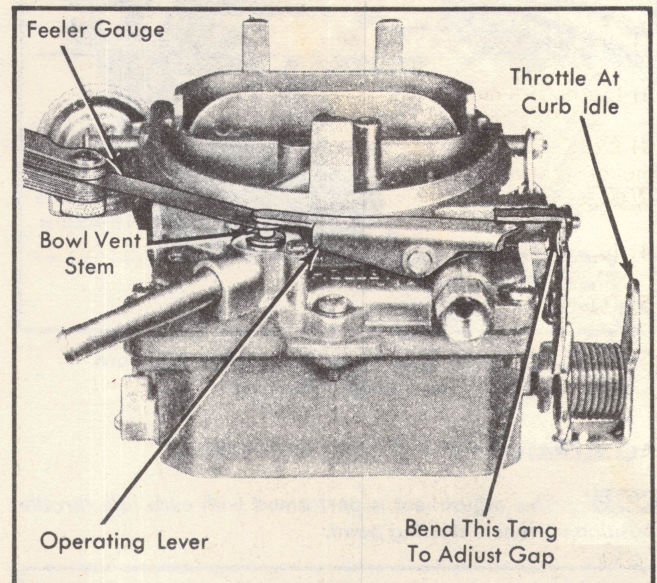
Using Feeler Gauge To Check Bowl Vent Valve Clearance
